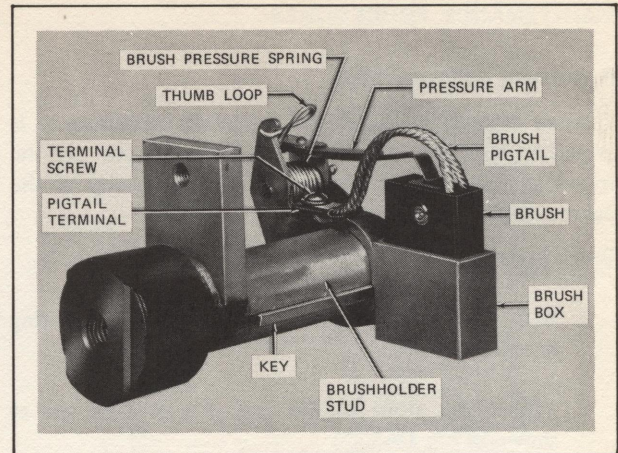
BRUSHHOLDER ASSEMBLY.
